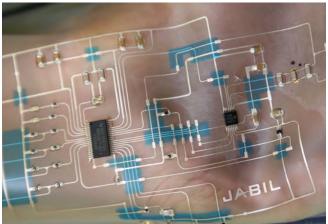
While traditional assembly techniques continue to dominate medical device assembly today, the emergence of additive manufacturing and printed electronics are helping manufacturers to deliver highly engineered and integrated products.
